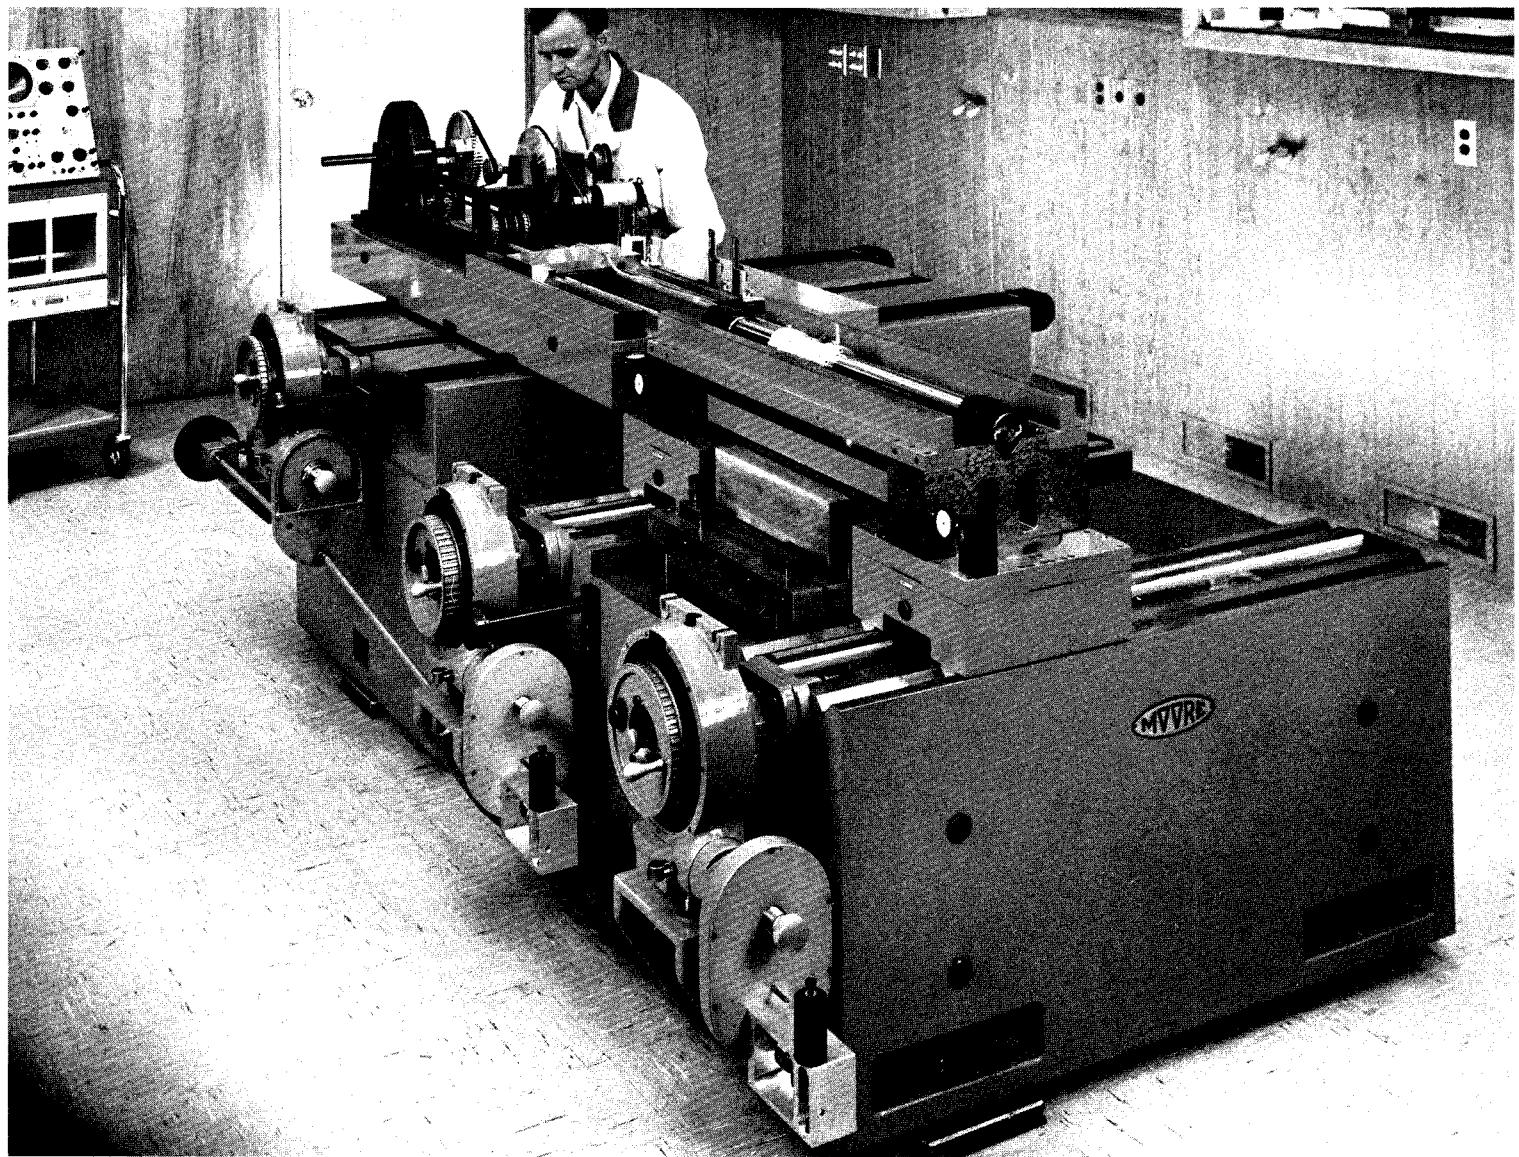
The ruling engine for the State University of New York, Stony Brook, is composed of two structures: (1) The ruling engine proper which must accurately
